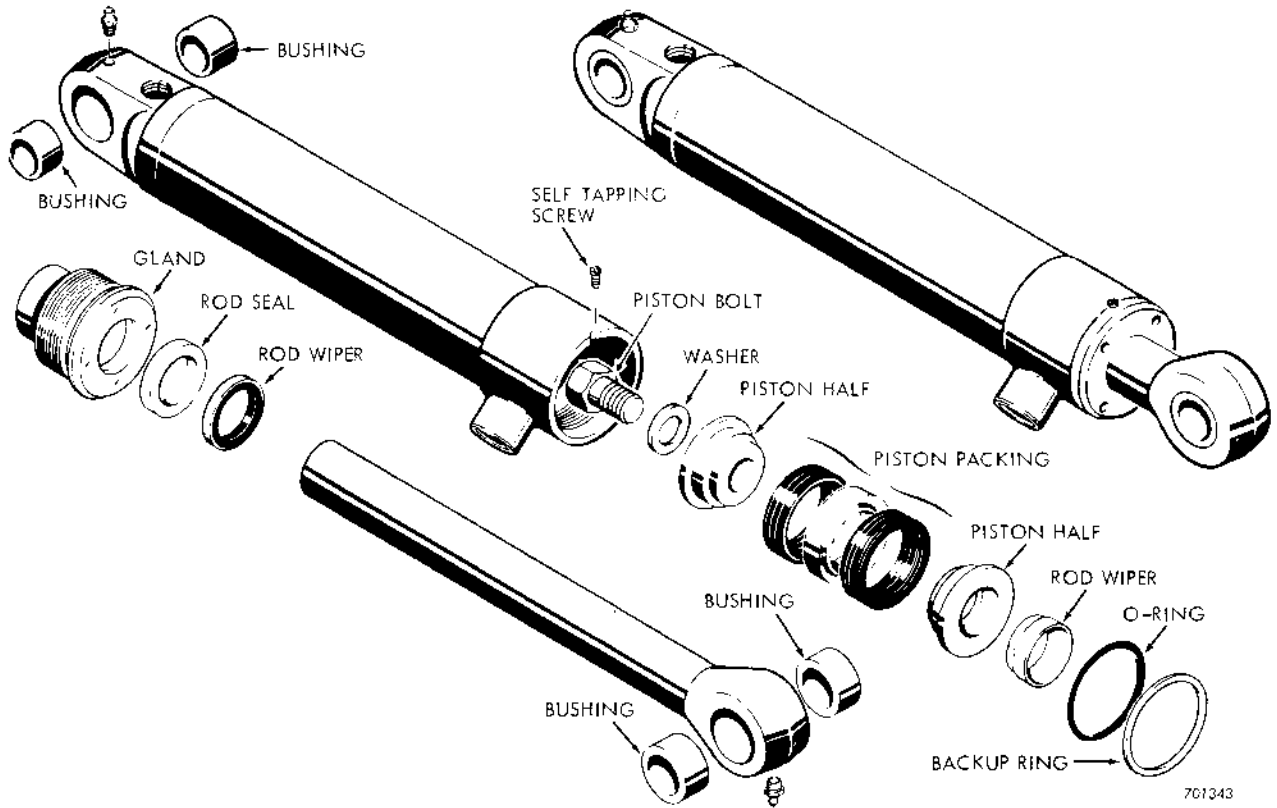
Exploded View of Typical Cylinder without Center Bearing
